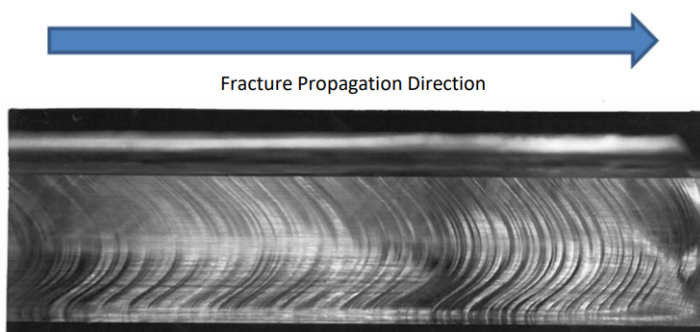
B. - Fracture Face Produced by Temperature Difference (Edge View)
